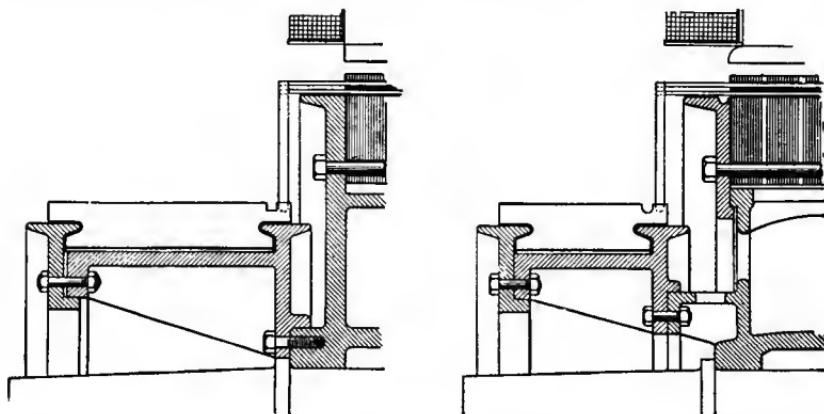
Commutator Construction for Large Machines. Commutator Spider is Bolted to Armature Spider
